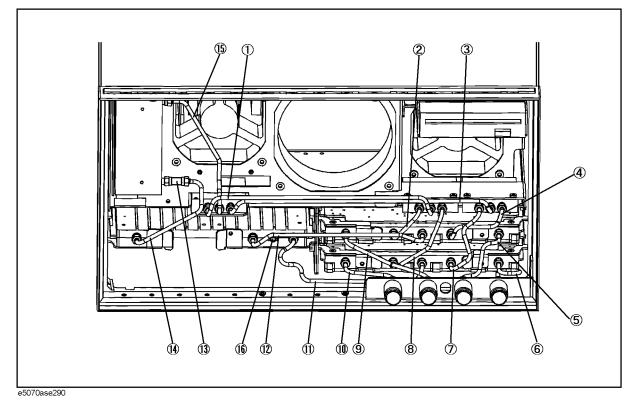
Front View (Semirigid Cables) (Opt. 414)
